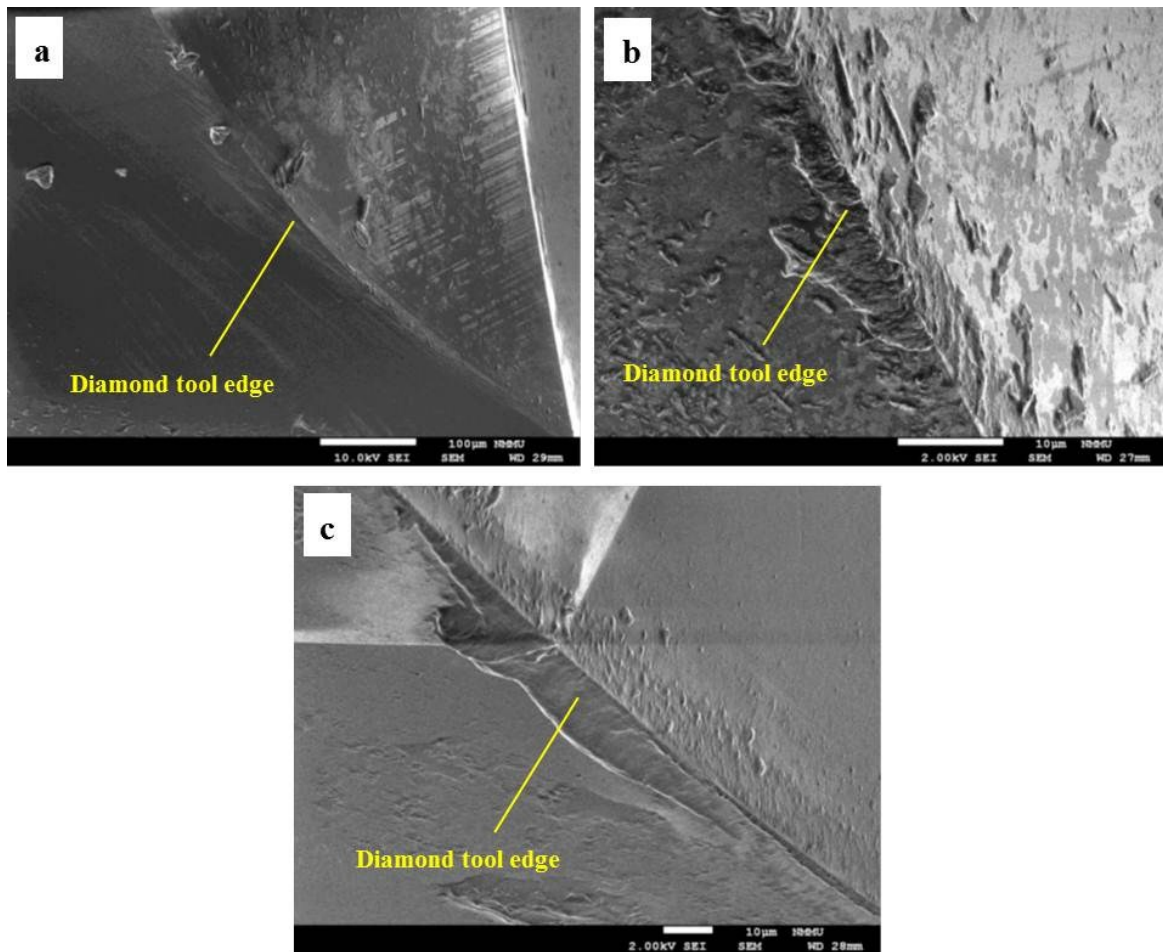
Diamond tool edge condition after 3.5-km cutting distance at three feed rates: a) 5 mm/min, b) 15 mm/min and c) 25 mm/min
